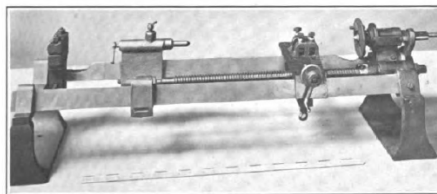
MAUDSLAY'S SCREW-CUTTING LATHE
